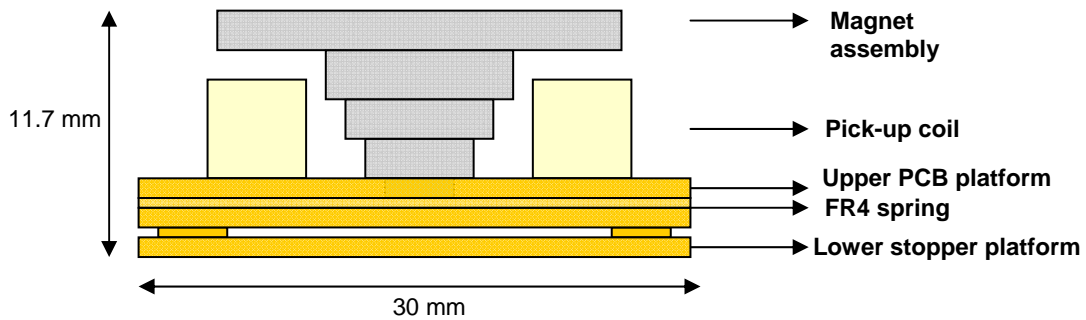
The FR4 spring, having a very similar design with the spring shown in figure 5.9, is sandwiched between two thicker FR4 platforms. This time, the oversized magnet, lower stopper platform and bobbin act as mechanical stoppers.
